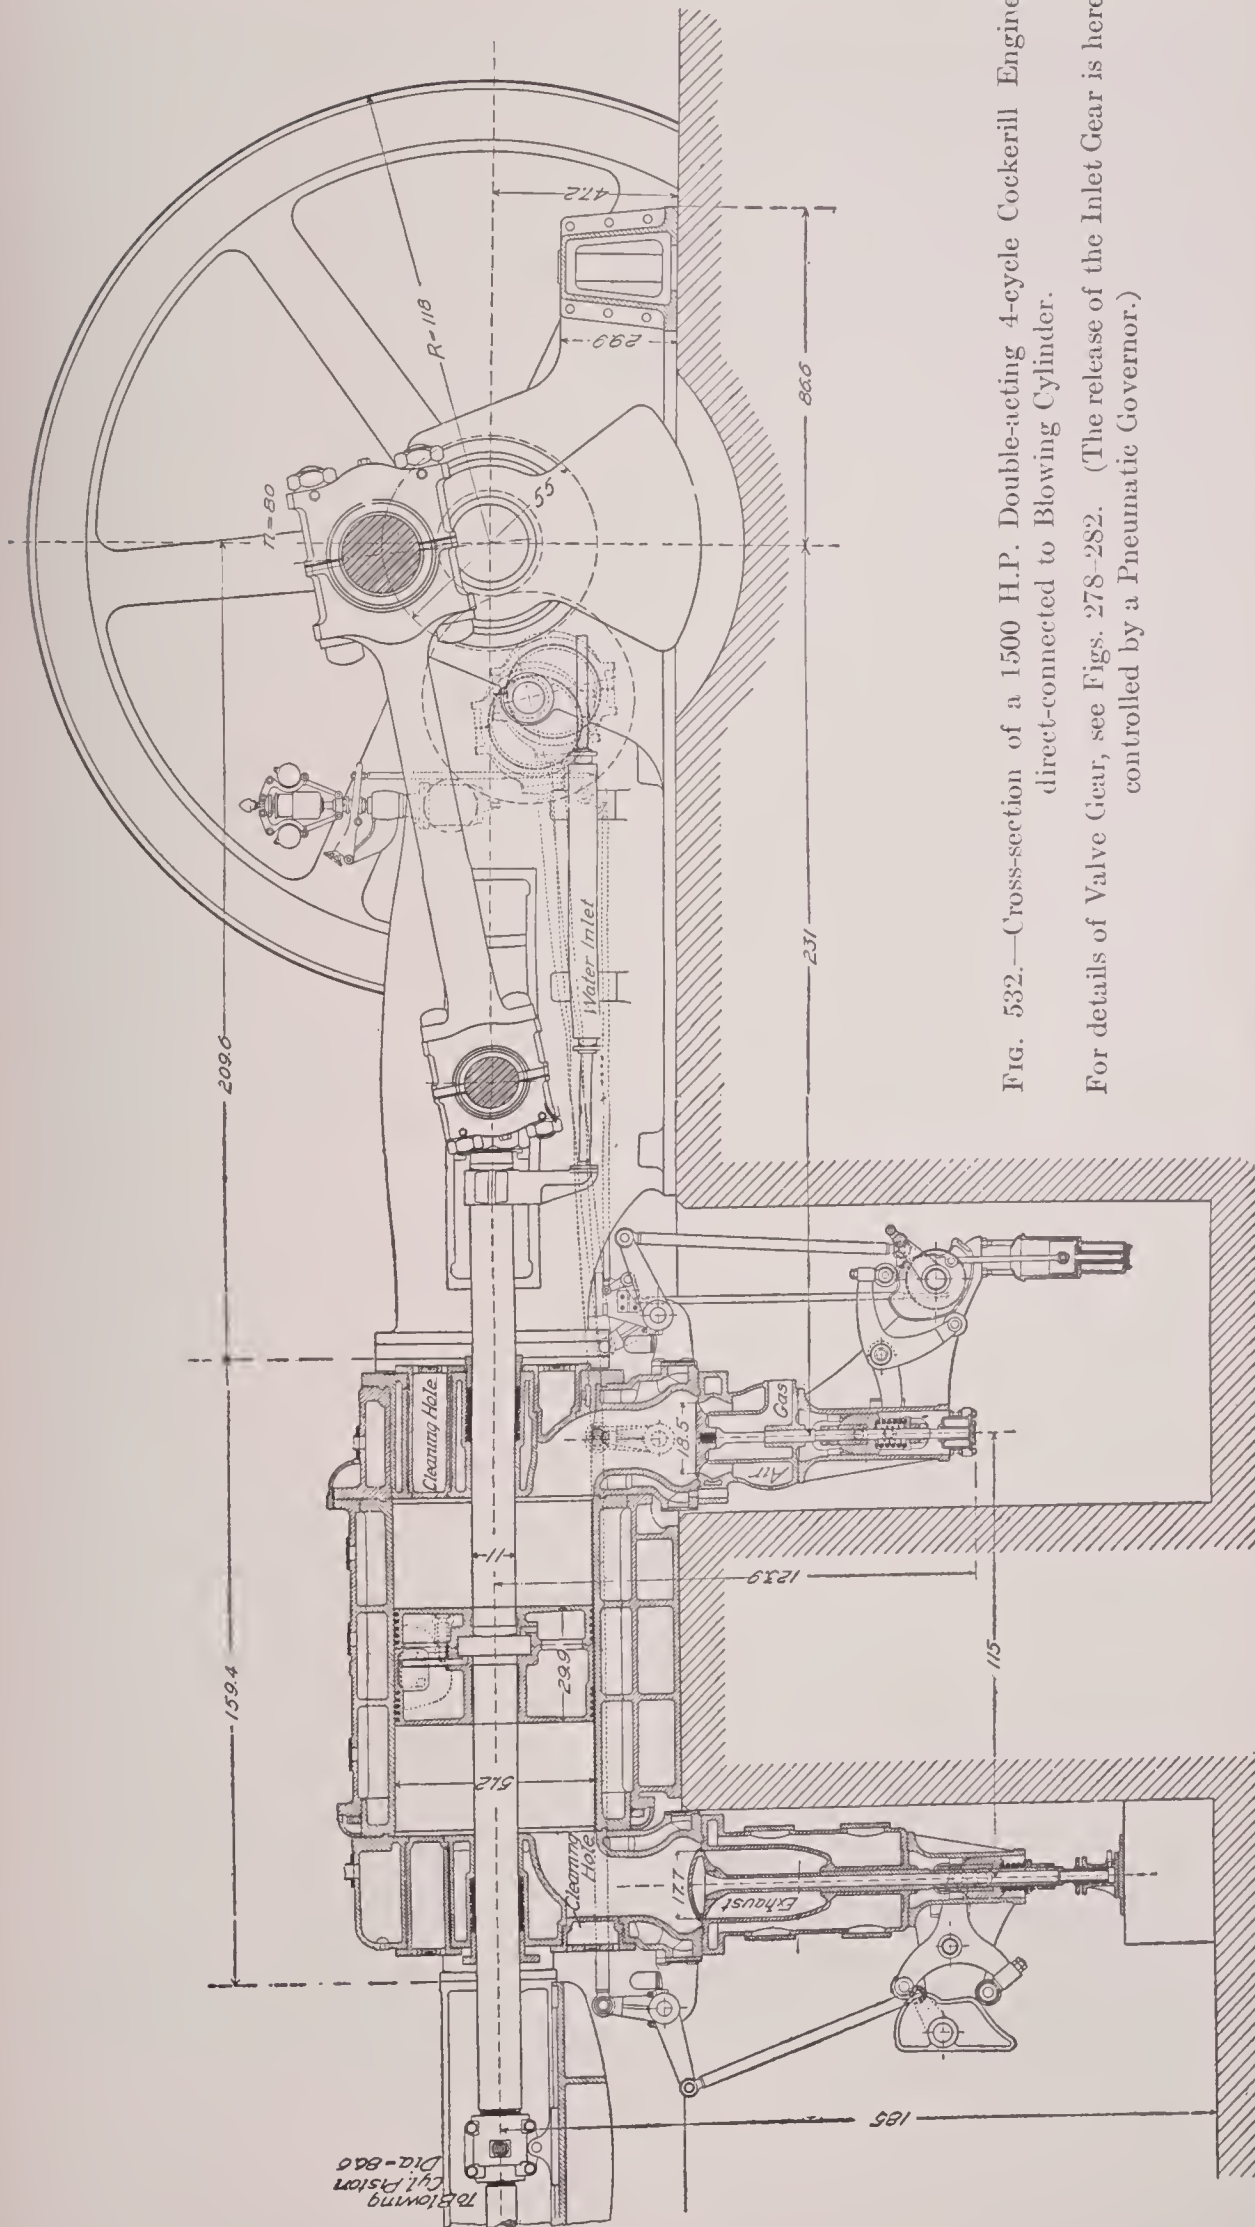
Cross-section of a 1500 H.P. Double-acting 4-cycle Cockerill Engine direct-connected to Blowing Cylinder.
